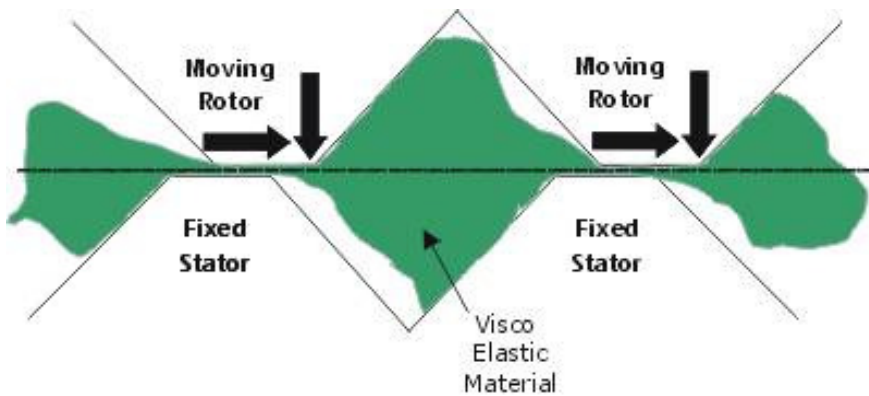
Cross-section through an operating HSM machine showing material movement between the rotor and stator surfaces
